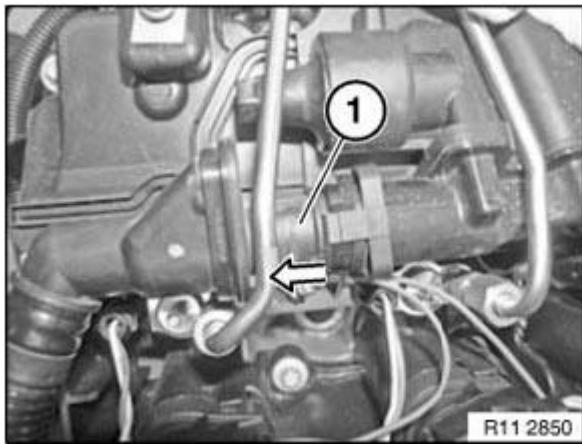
Identifying Crankcase Breather On Cylinder Head Cover
